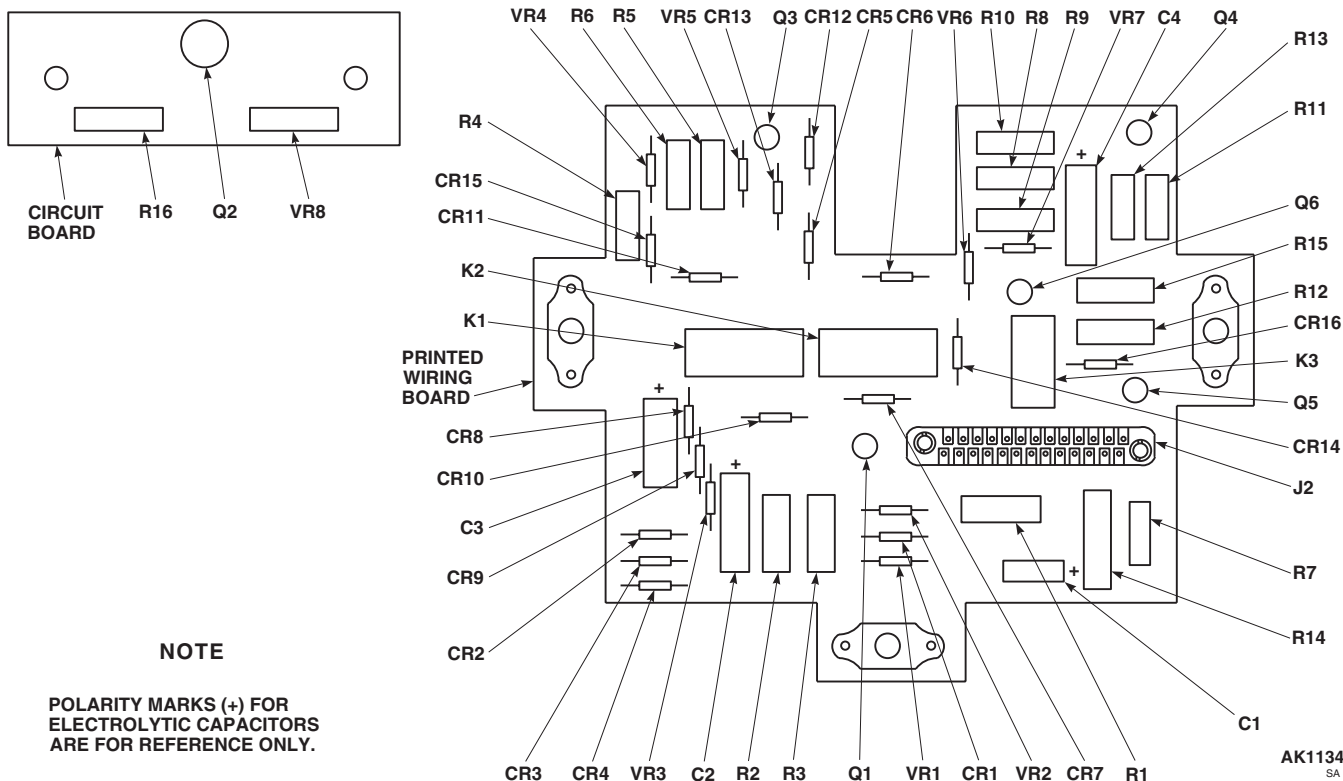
REPLACE BLADE DEICE TEST PANEL PRINTED WIRING BOARD AND CIRCUIT BOARD COMPONENTS (BENCH)
